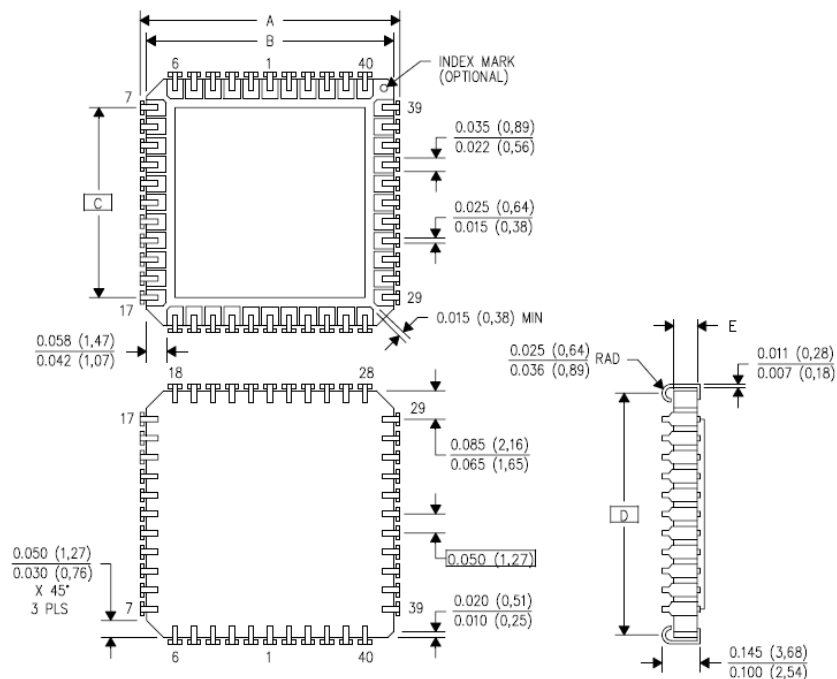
The Footprint of a 44 Pins JLCC IC Package
